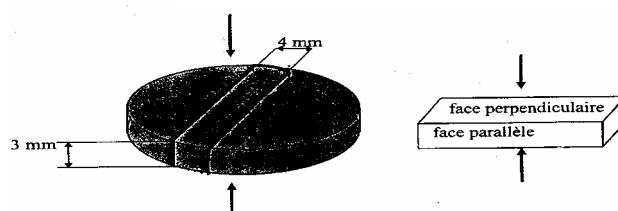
Disc shaped sintered specimens and cut to bar shape samples
